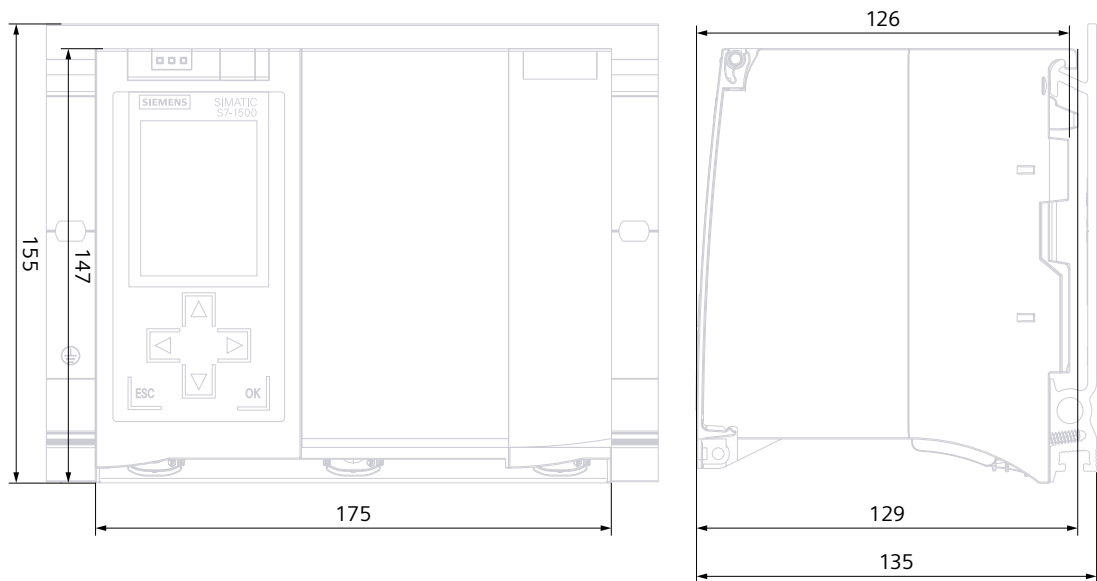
Dimension drawing of the CPU 1518-4 PN/DP MFP, front and side view
